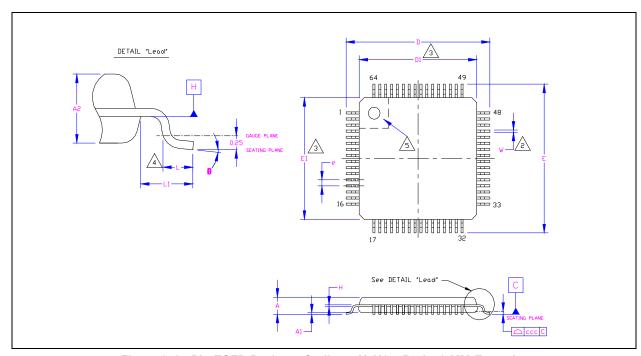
64 Pin TQFP Package Outline, 7X7X1.4 Body, 2 MM Footprint
